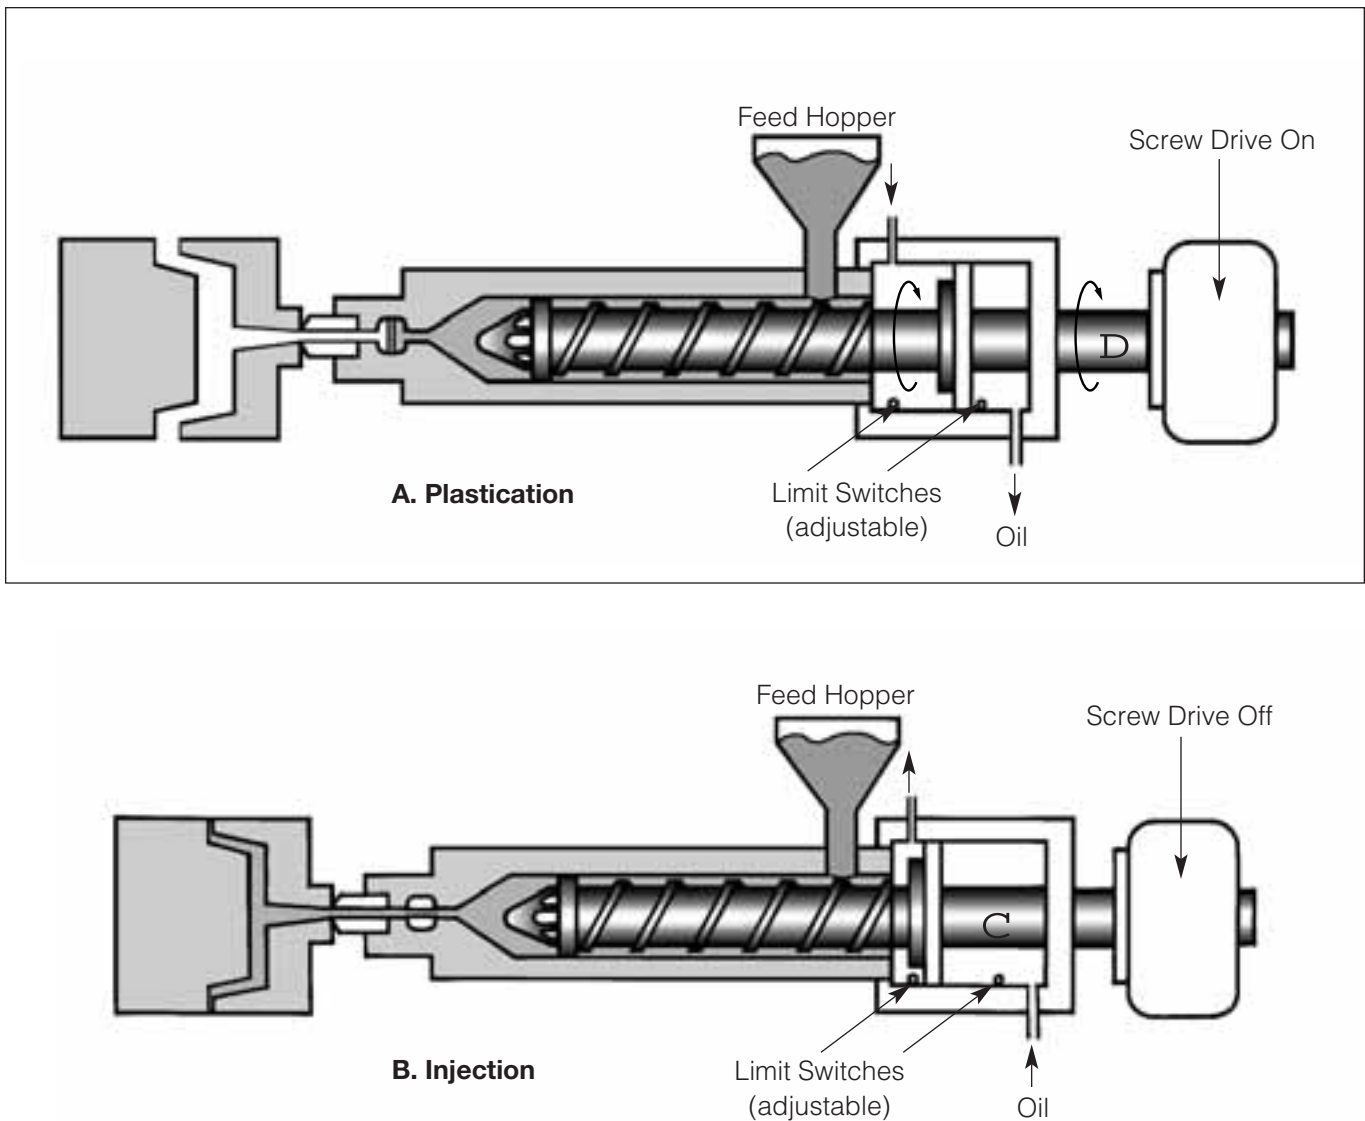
Molding Sequence, Single Stage Reciprocating Screw Injection Molding Machine
